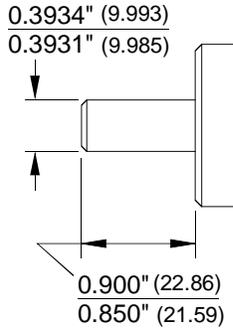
Servo Mount, Side Connect Outline Drawing
